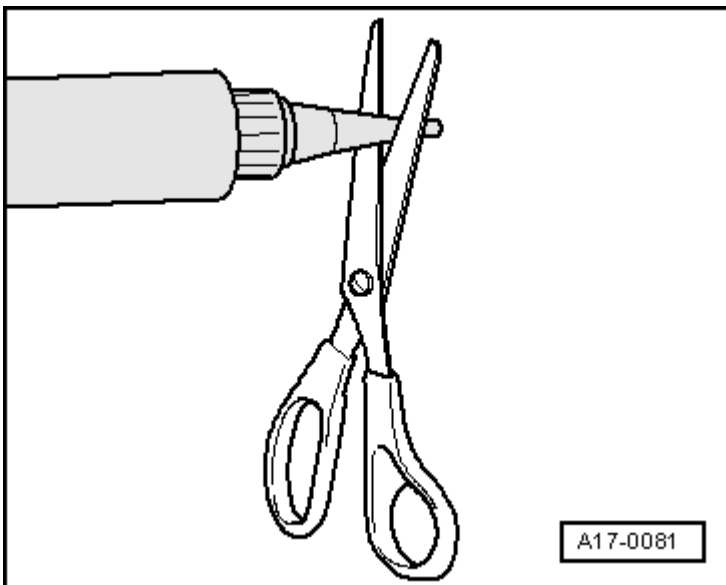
Identifying Cut Tube Nozzle At Front Marking (Nozzle Diameter Approx. 3 Mm)
